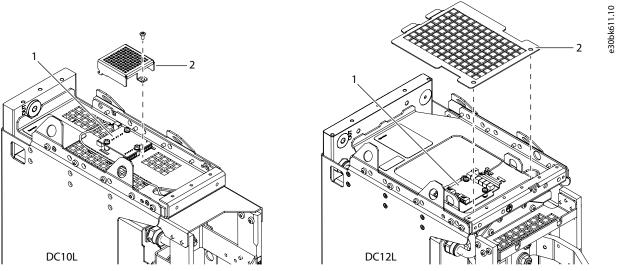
Accessing the AuxBus Temperature Measurement Board
